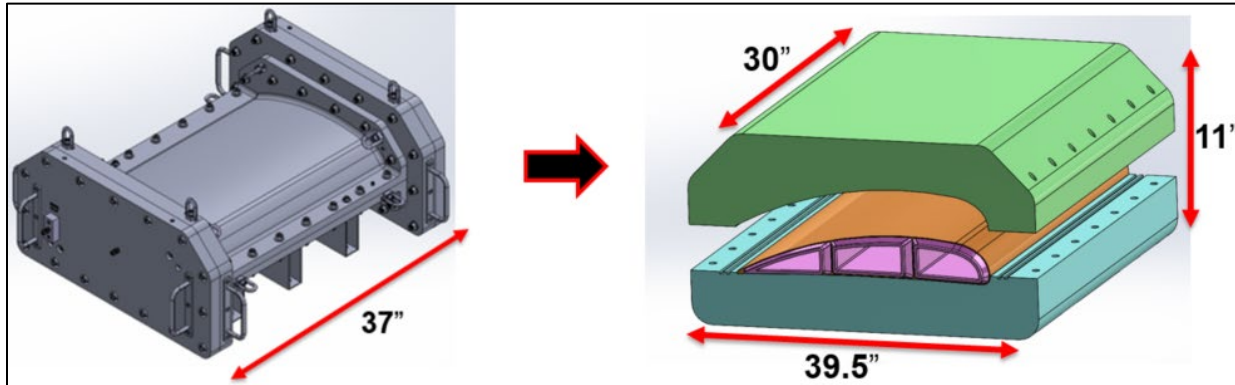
SpinTech's Trailing Edge Bond Tool CAD File Modified for AM
